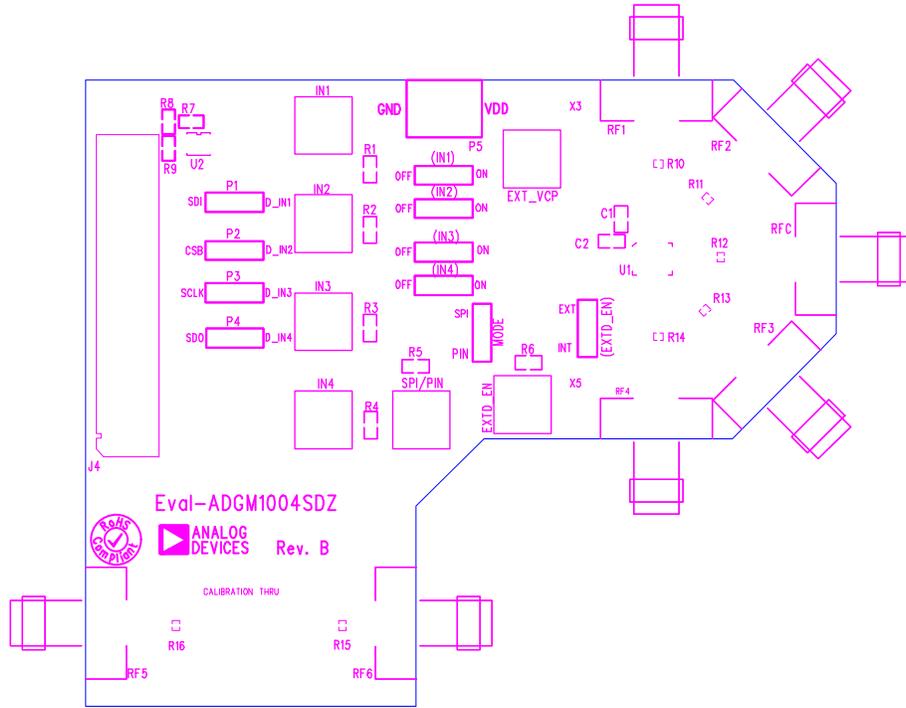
EVAL-ADGM1004SDZ Component Side, Silkscreen PCB Drawing (Top)
